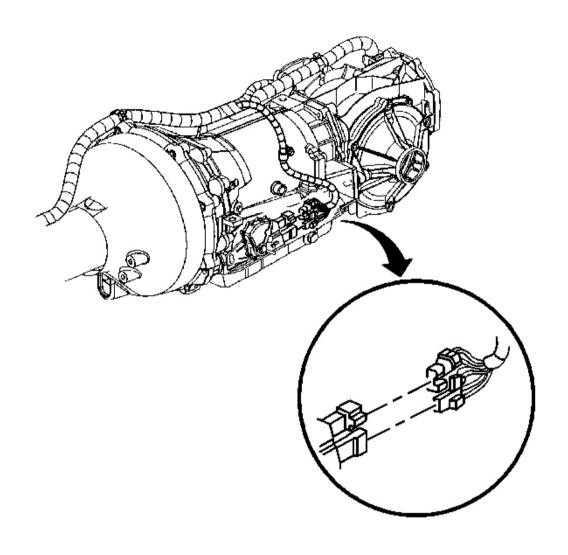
Park/Neutral Position Switch Electrical Connectors Courtesy of GENERAL MOTORS CORP.
